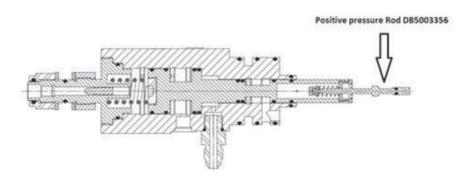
Piston Assembly Showing Positive Pressure Rod
